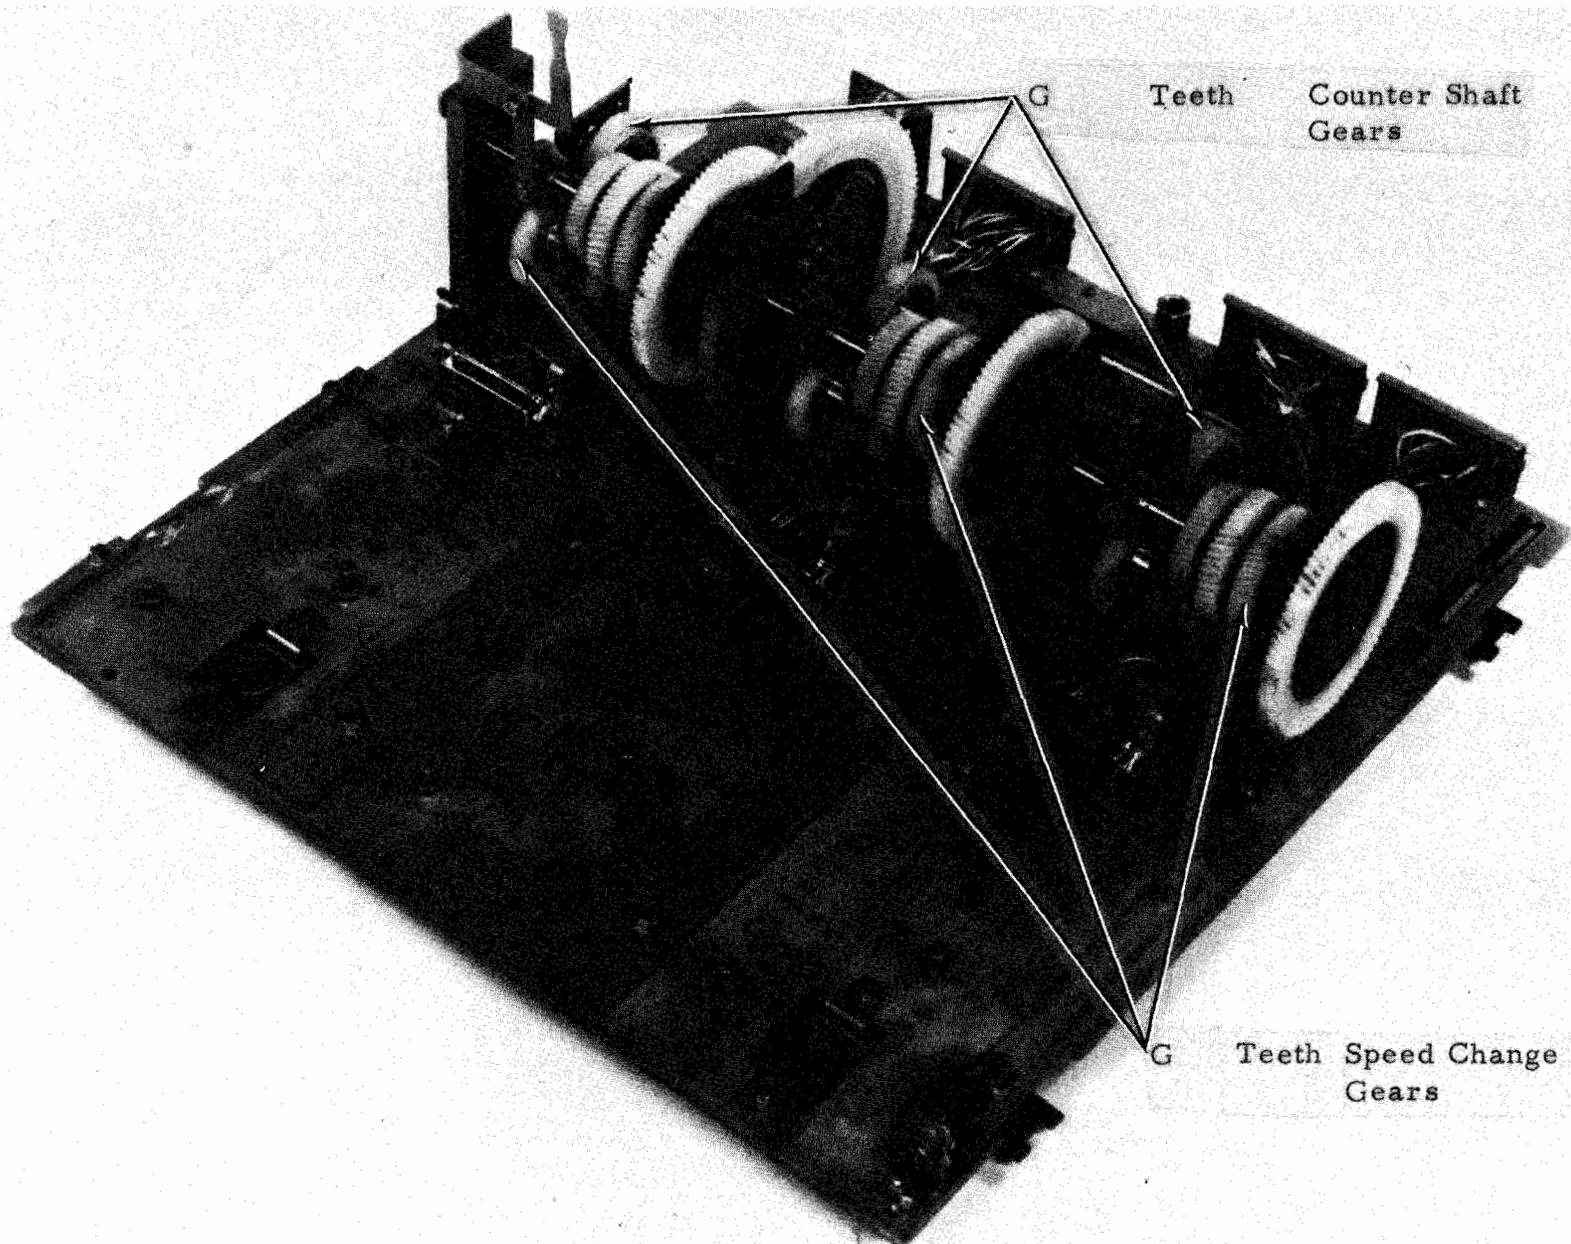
Drive Gears and Speed Change Gears - Multicontact Multiple Mounting Bases (Variable Speed)
